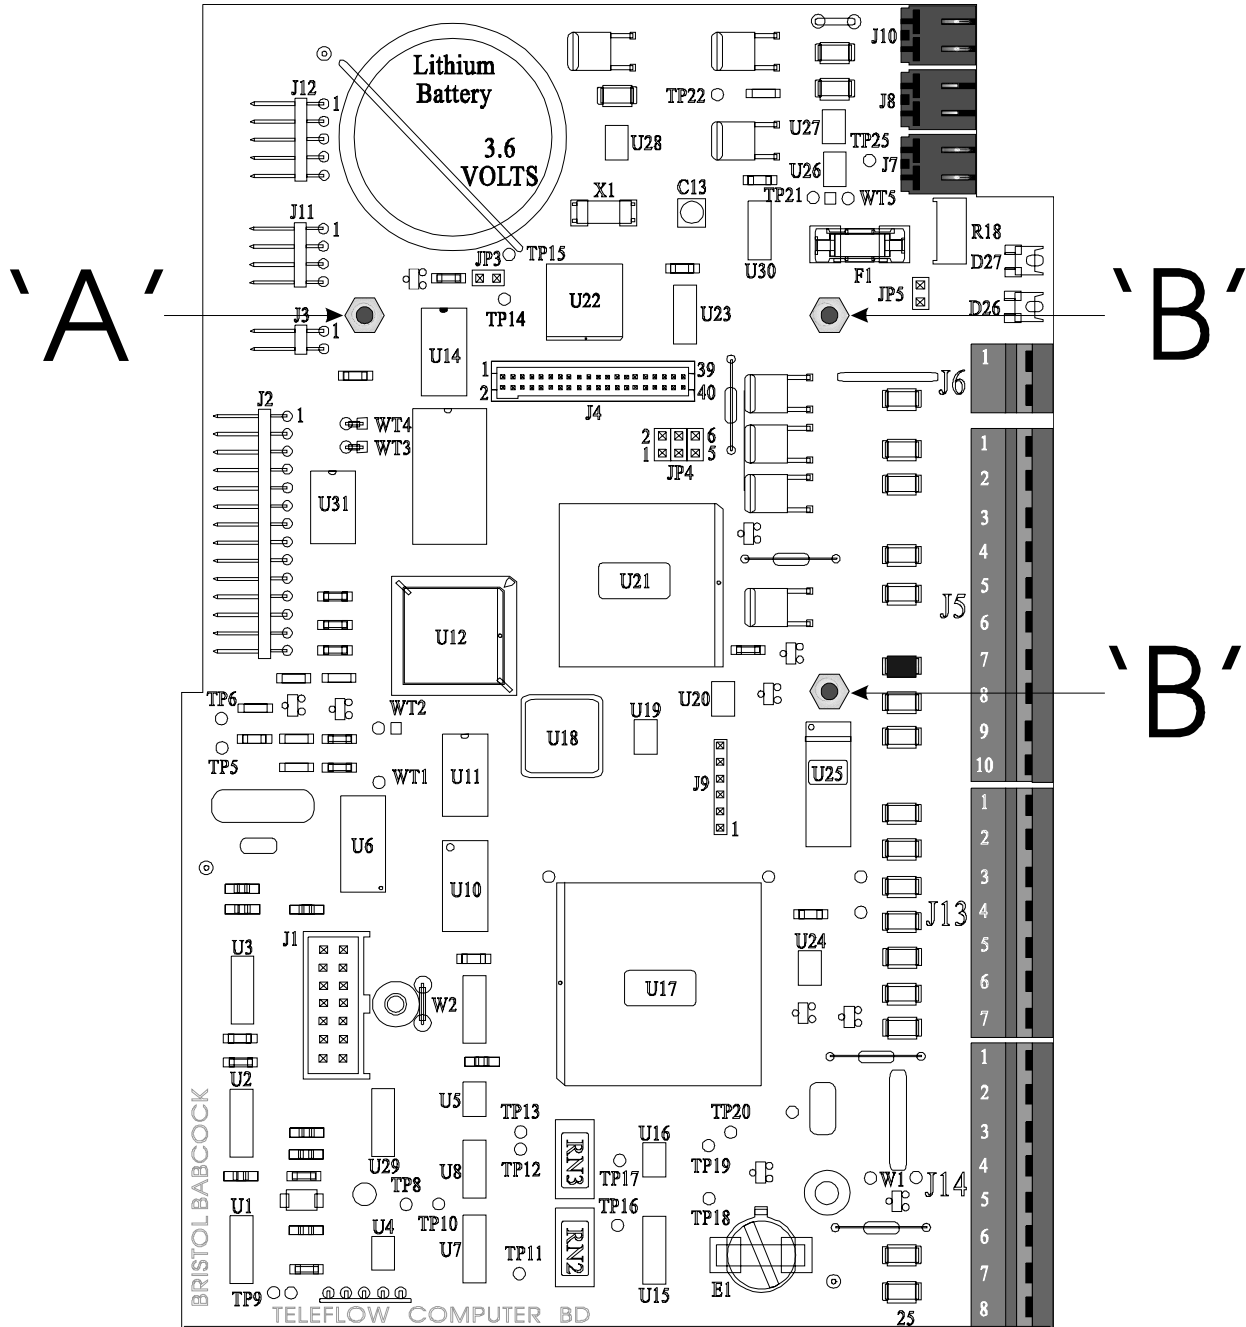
TeleFlow CPU Board – Installation Drawing #1
